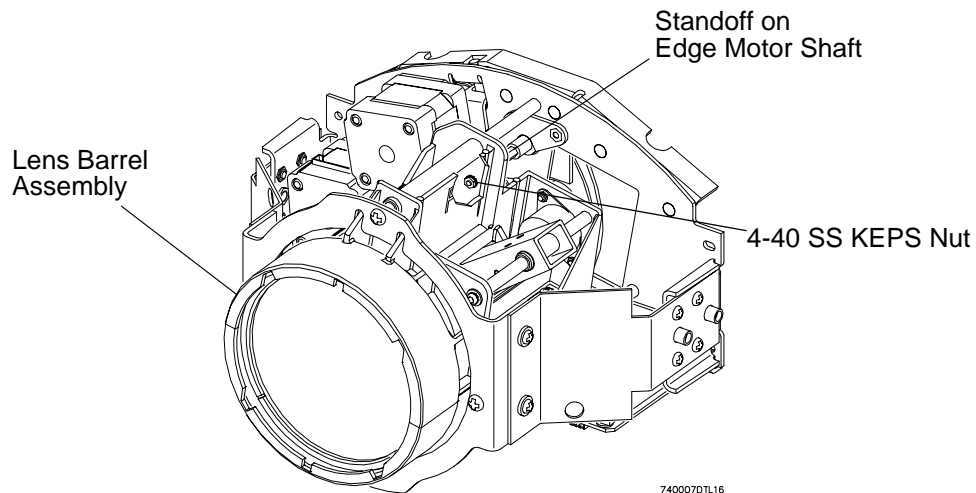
Removing Nut From Edge Motor Assembly Shaft
